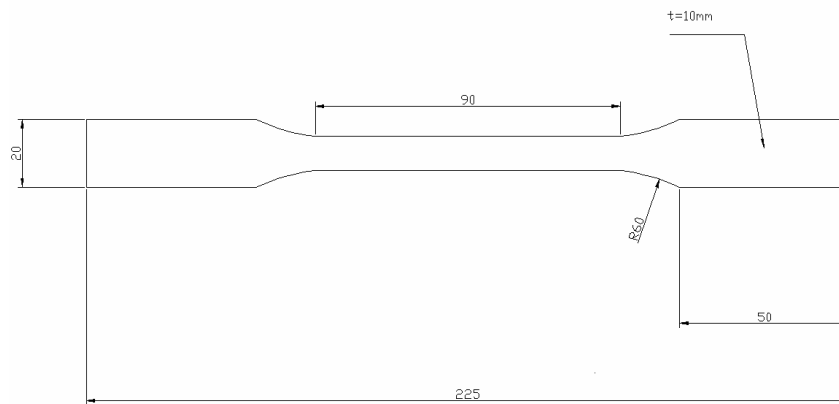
Dimensions of tensile test epoxy specimen (all dimensions in mm)
